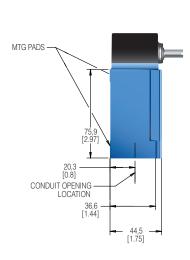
MICRO SWITCH HDLS side rotary (double pole) dimensions
